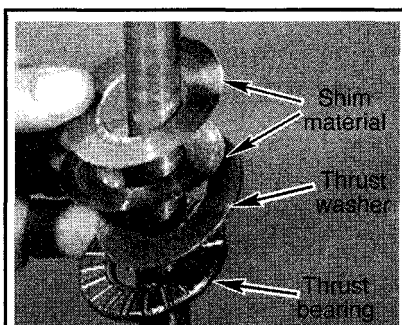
just make sure that when they are installed, the thrust bearing goes on first, followed by the thrust washer and shims
